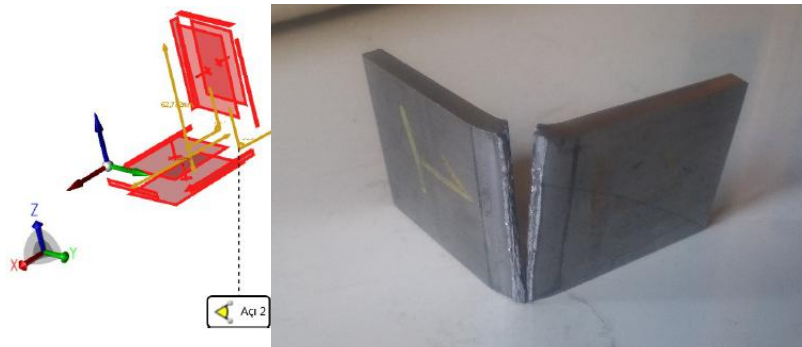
Illustrations of Formed Workpieces Measured by CMM and Cold Bent Workpiece.
